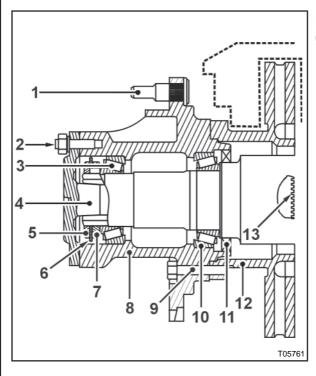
Classic wheel bearing set-up (drive axle installation)
